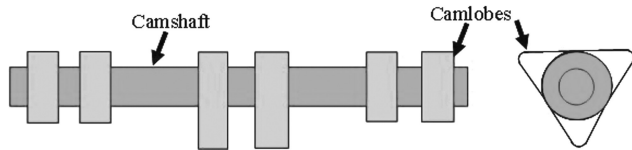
A schematic drawing showing the position of camlobes on a camshaft.
